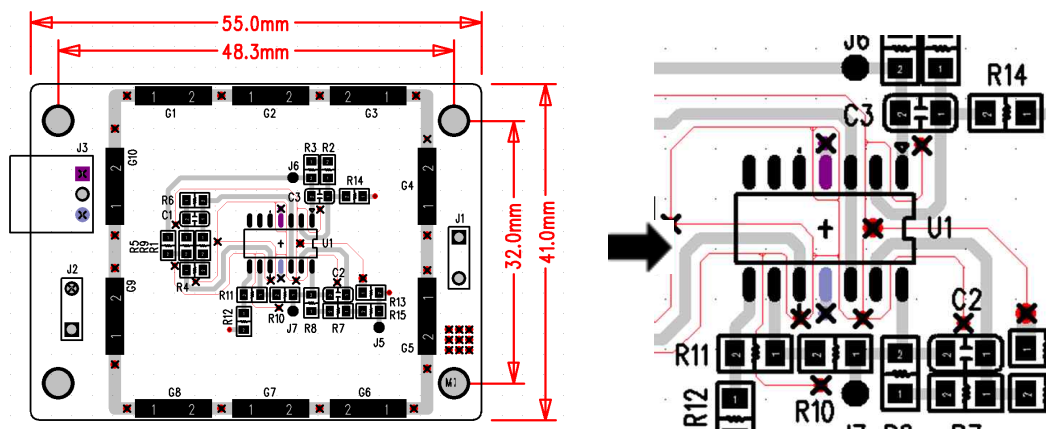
Guard ring design on PCB (left) and extended figure (right)
